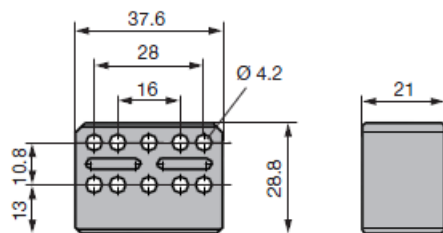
Installation dimensions of BTL6-A-3800-2 magnet
